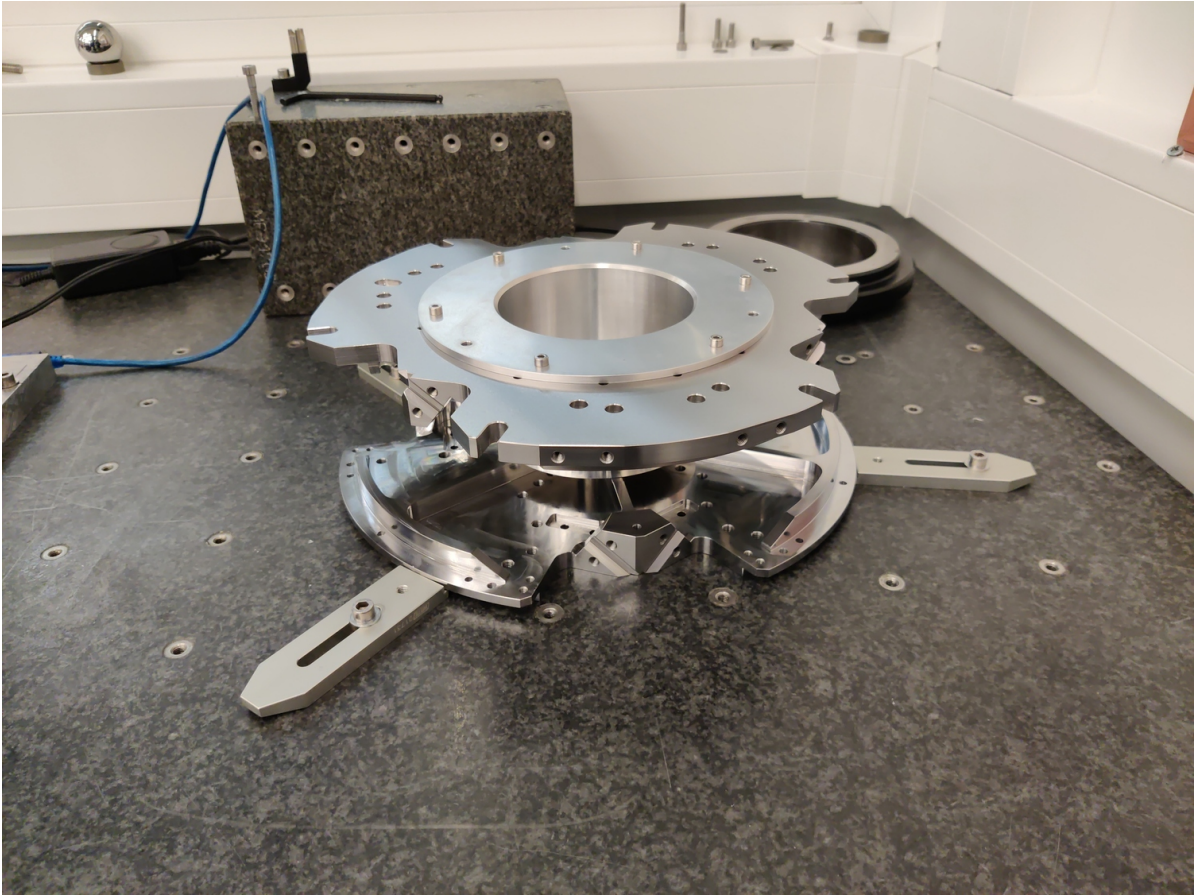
Bottom and top plates mounted together with the special tool (top view)
